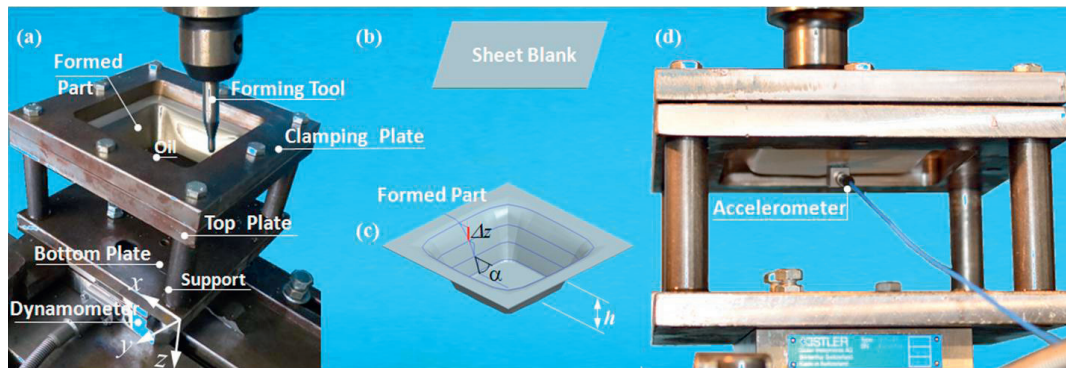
(a) Single point incremental forming experimental setup mounted on a Kondia CNC milling machine, (b) sheet blanks, (c) formed part with a depth of 41 mm and (d) accelerometer mounted on the formed part.
